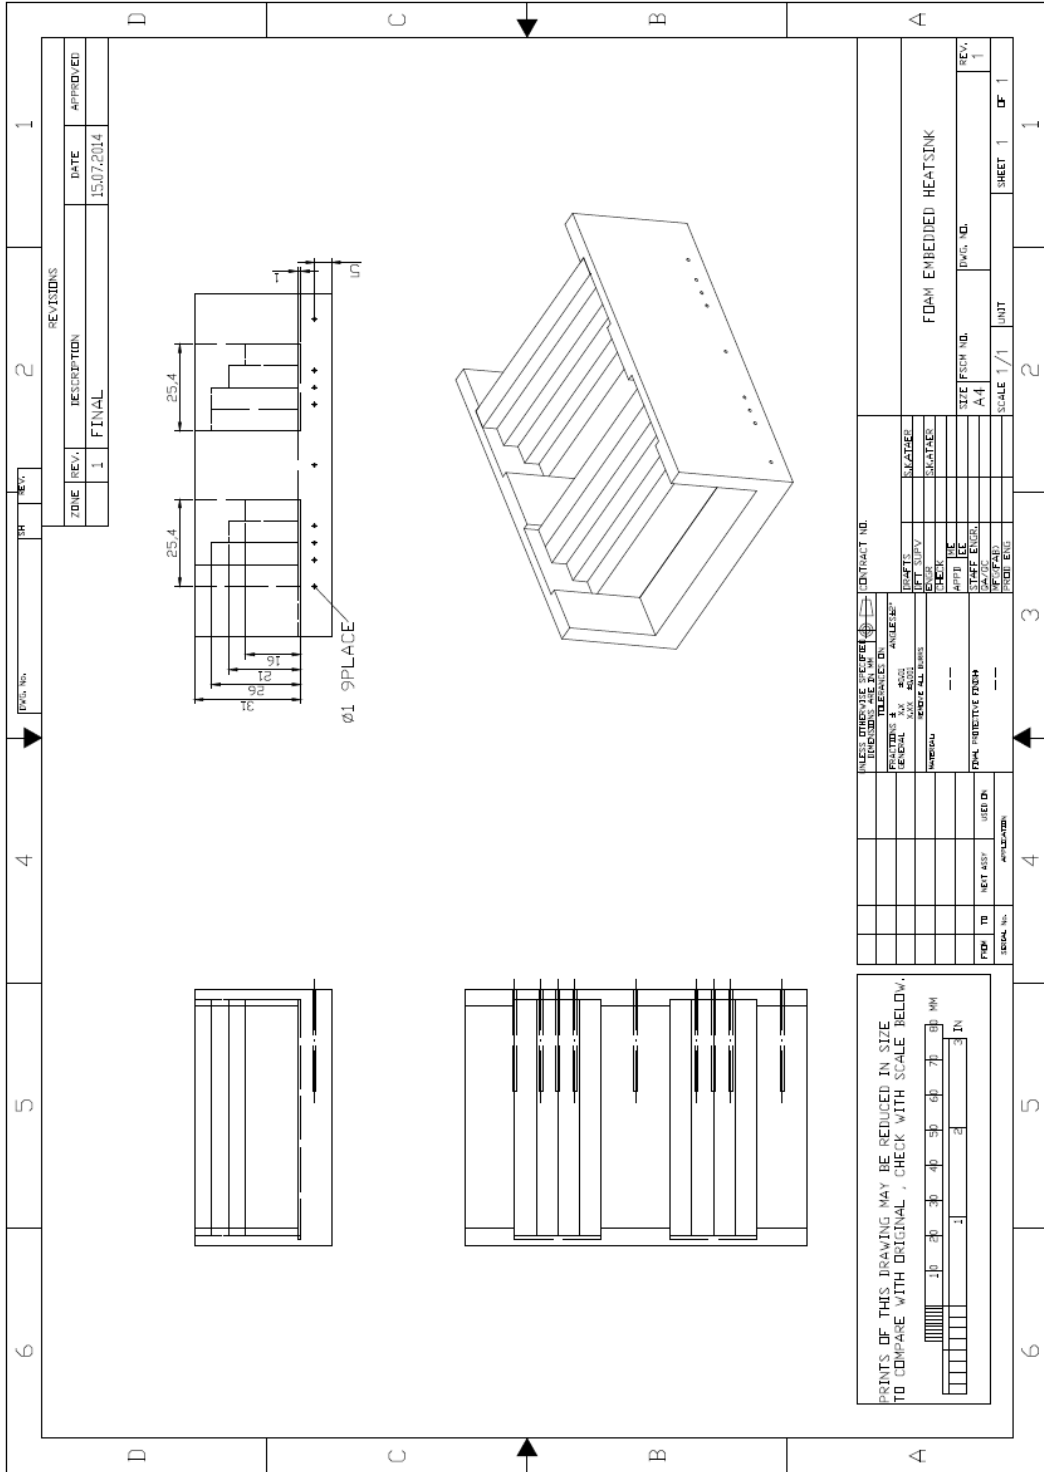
Technical drawing of foam embedded heat sinks concept design
